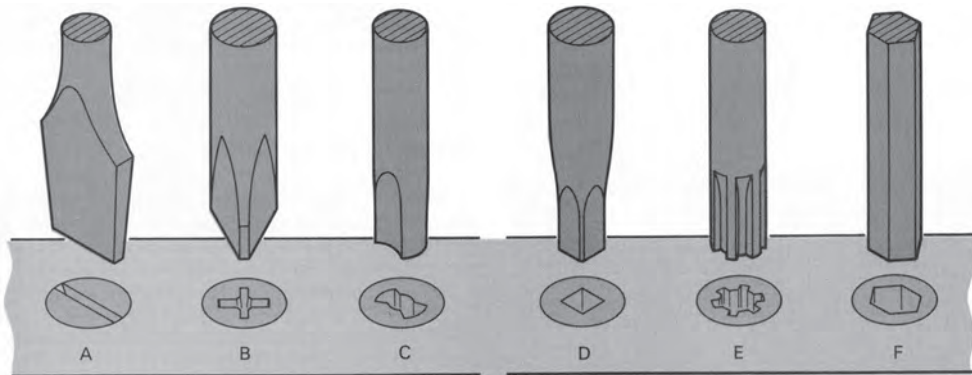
Screwdriver tips. A – Standard, B – Philips, C – Clutch, D – Square, E – Torx, F – Hex
